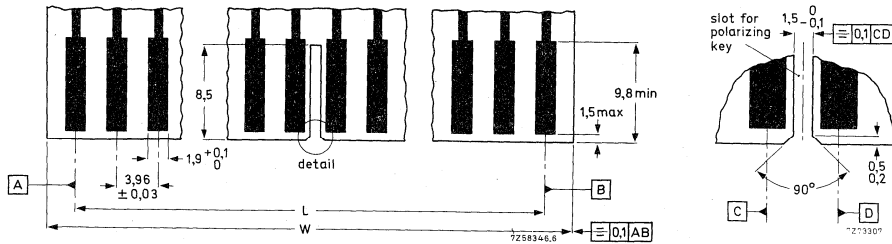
Recommended dimensions of the printed-wiring board; see Table 6 for dimensions L and W.
